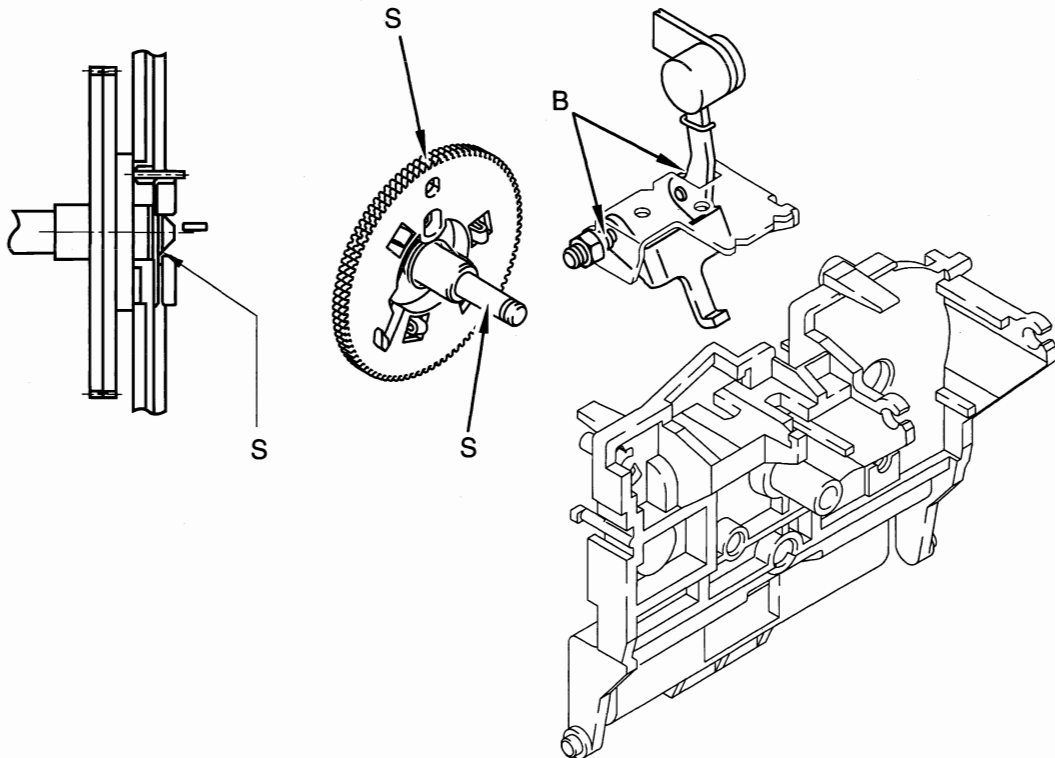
Daisy wheel gear and hammer holder assembly
